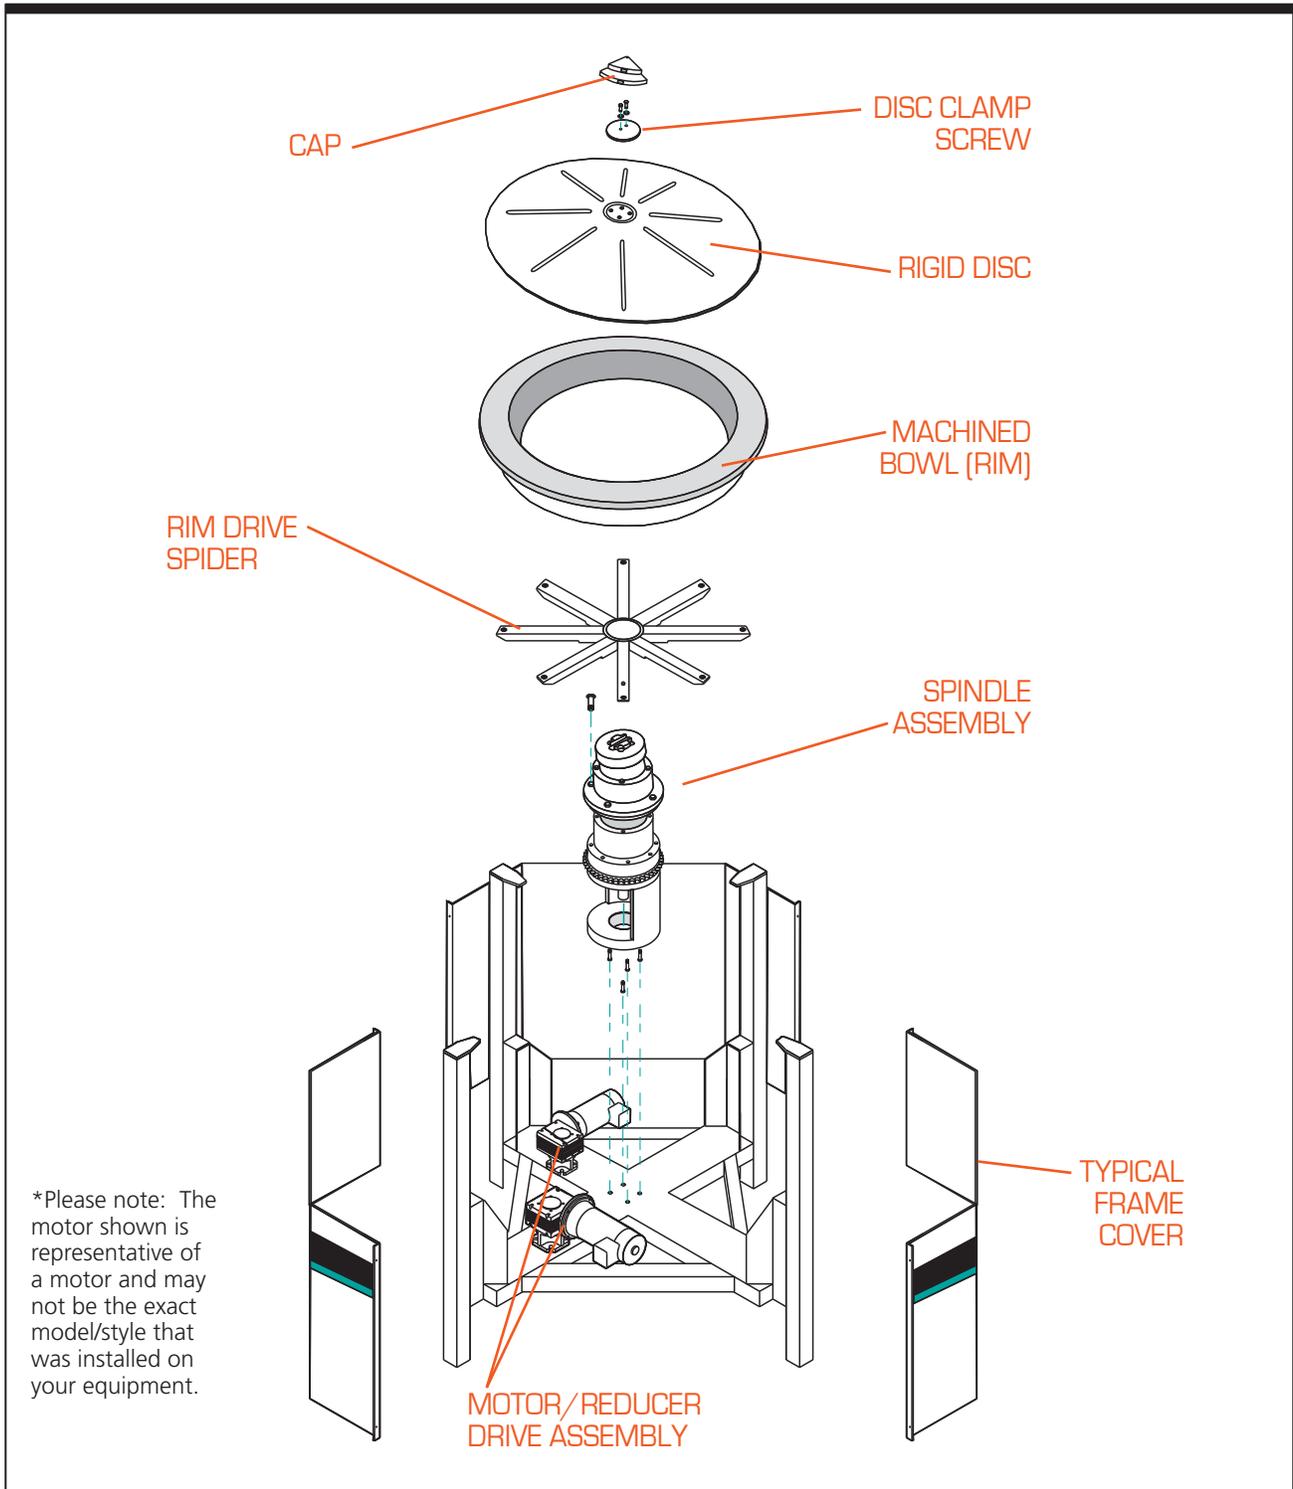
Typical FT-Series Dual Drive Feeder - Exploded View
